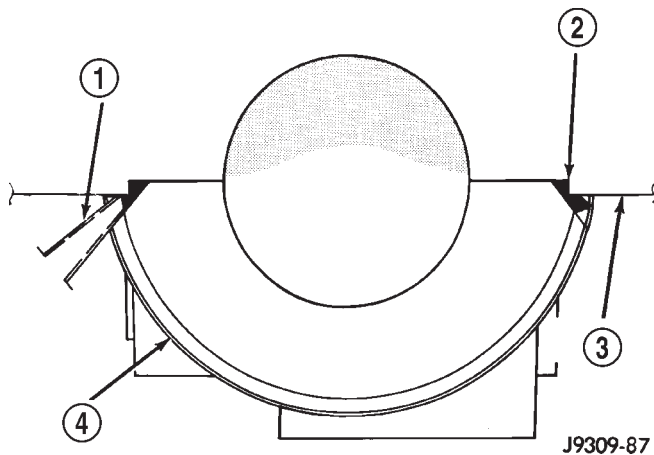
Apply Sealant to Bearing Cap to Block Joint
